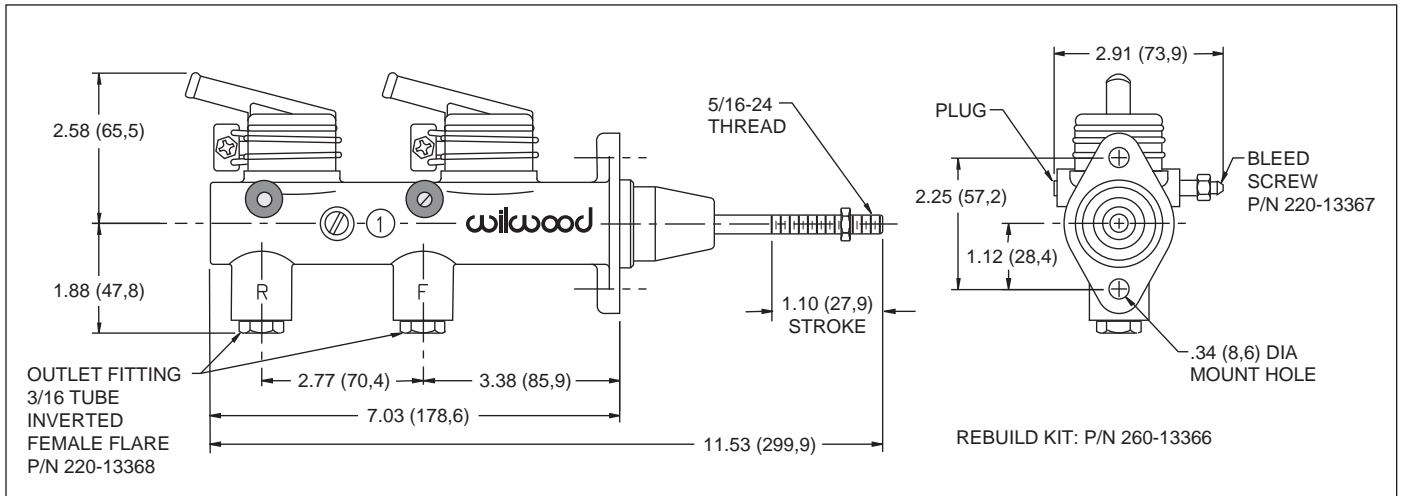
Wilwood 1" Tandem Master Cylinder, Mounting Dimensions
